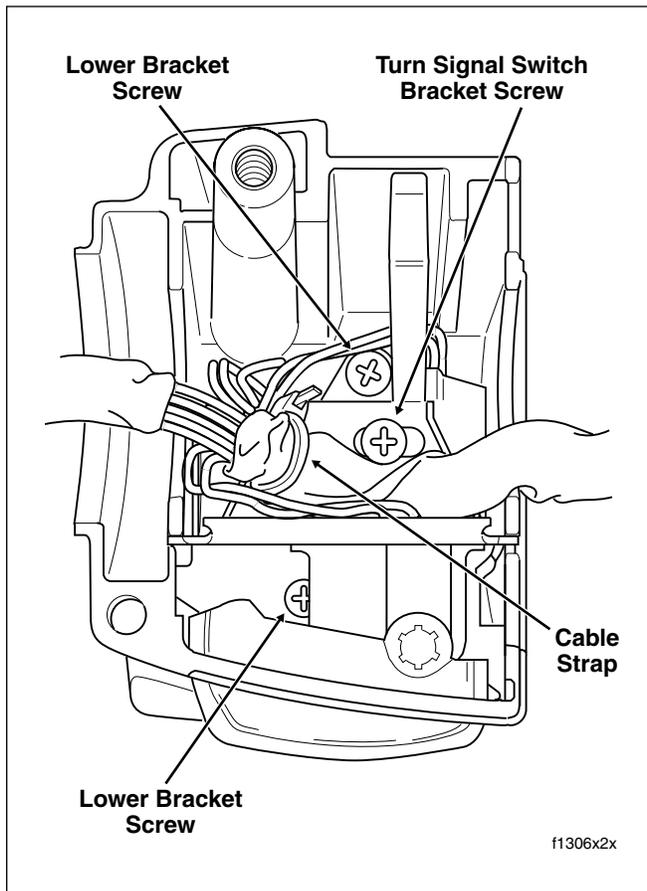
Lower Left Handlebar Switch Housing (Without Splices) - Classic/Ultra Models
